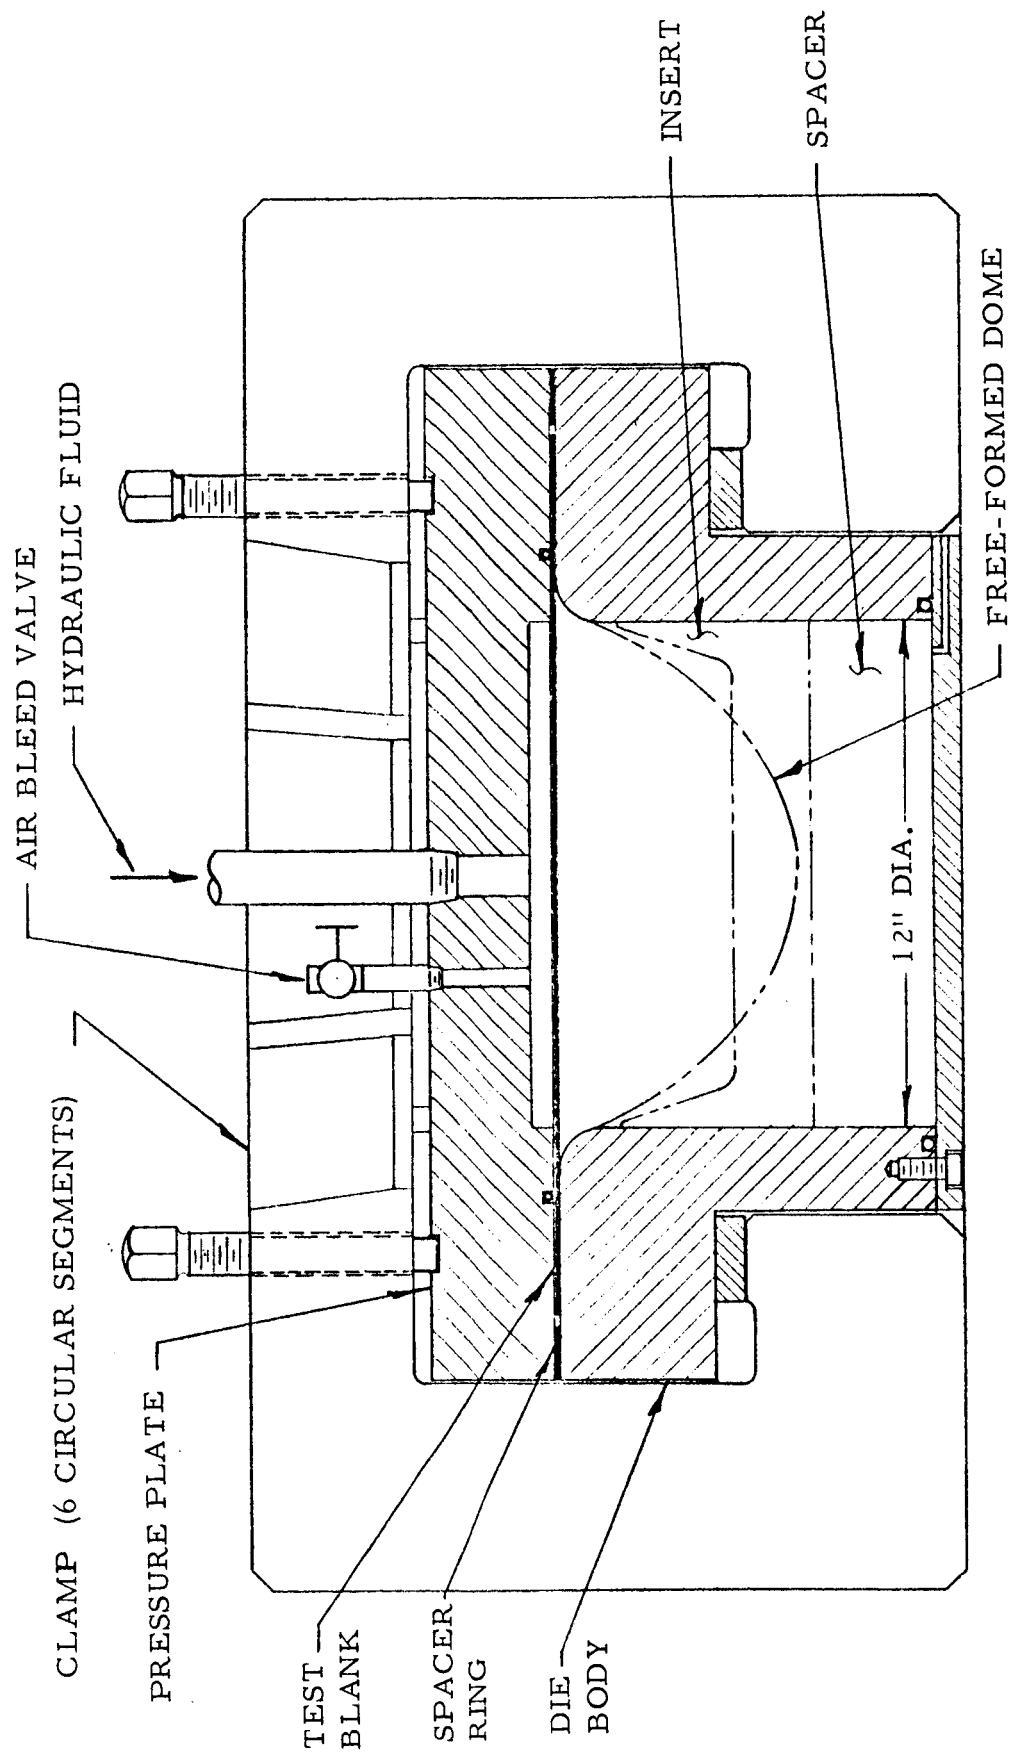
FORMING DIE - HYDRAULIC FORMING
